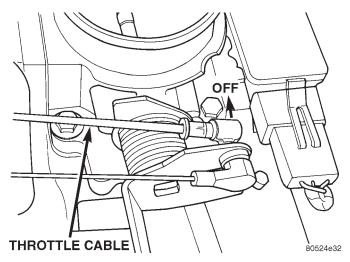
Throttle Cable at Throttle Body—4.0LEngine
